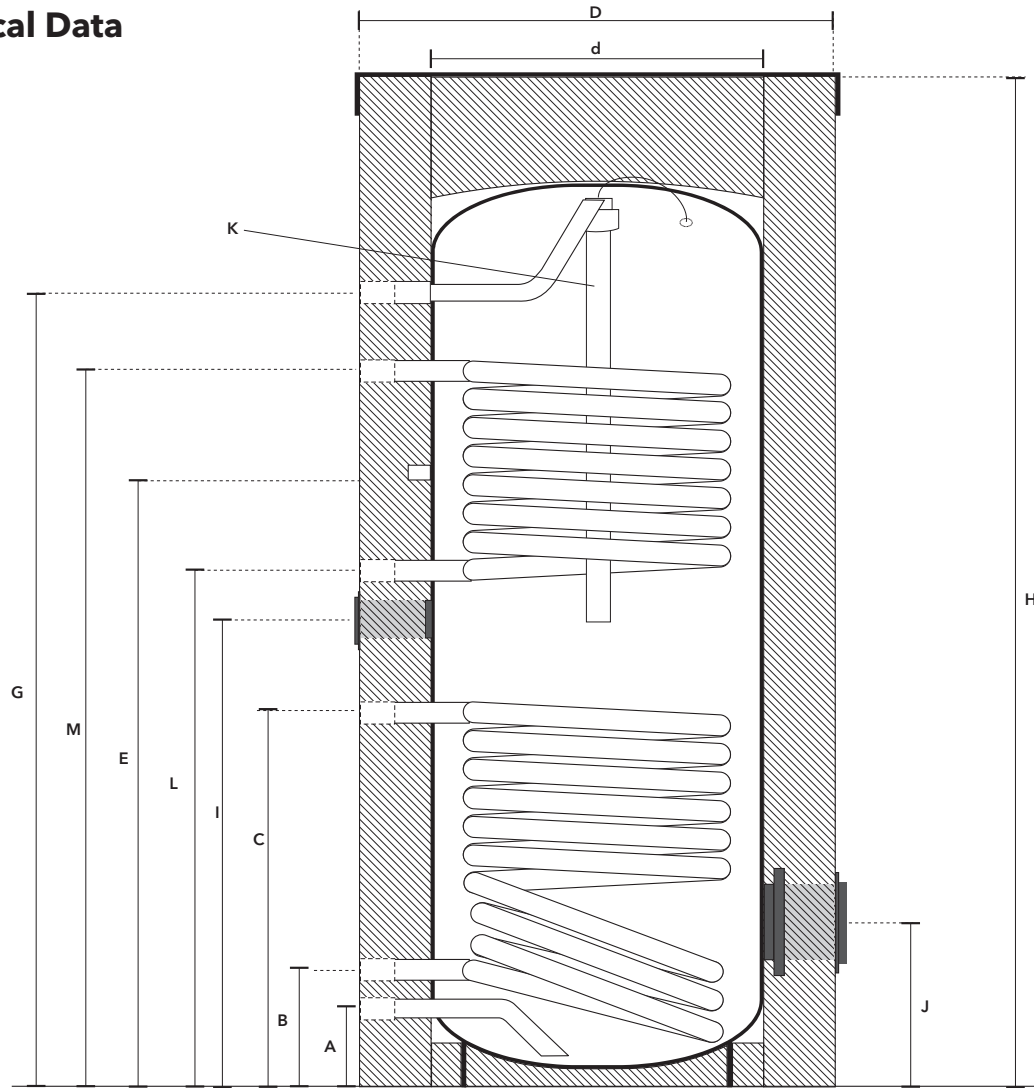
Sectional view of the ECOplus solar cylinder with dimensions.
